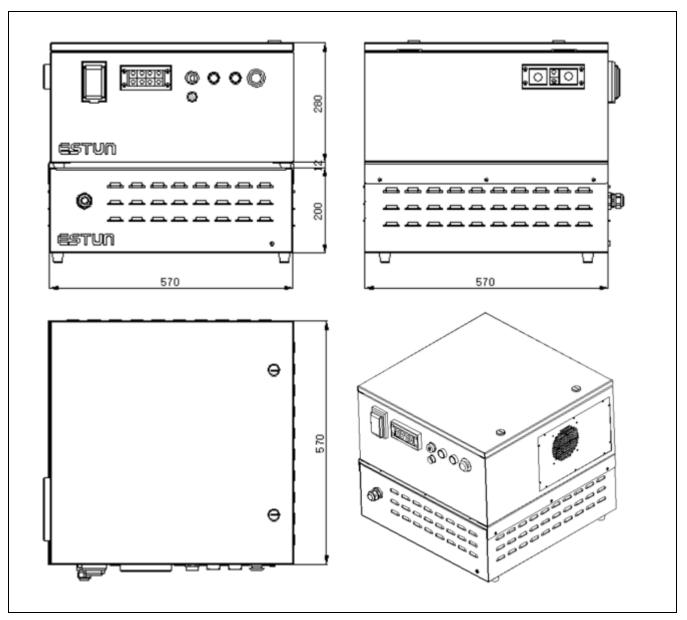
Product Dimensions (ER20-1780, ER20-1780-F, ER20-1780-HI, ER20/10-2000-HI, ER30-1880, ER35-1880-LI)
